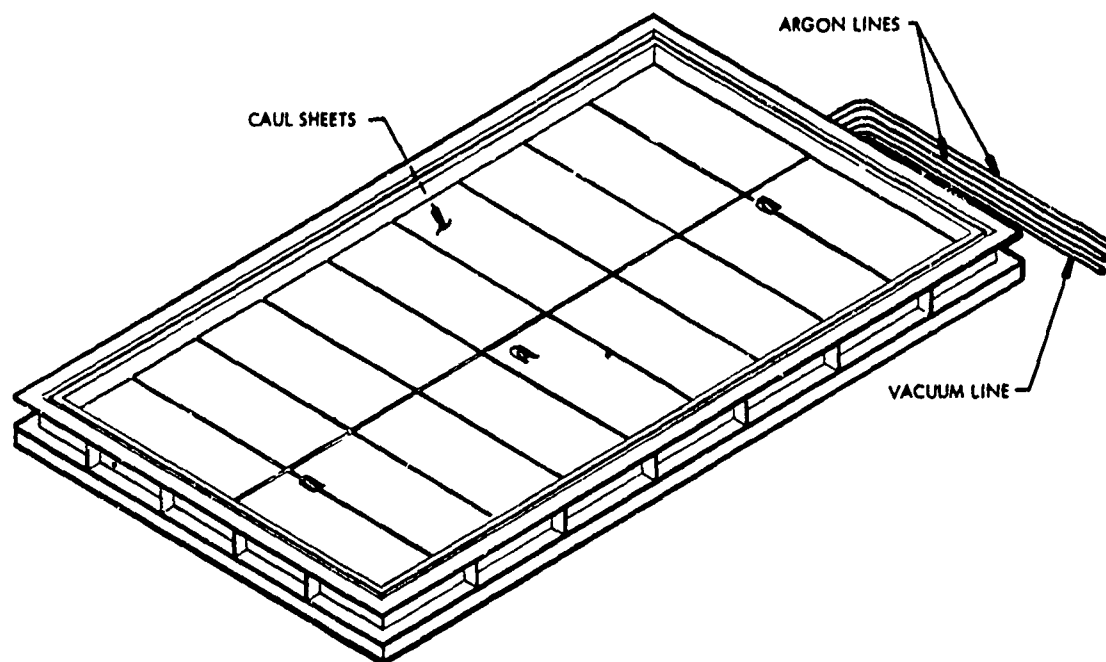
BRAZE BOX TOOLING ILLUSTRATING CAUL SHEETS, ARGON LINES AND VACUUM LINE
